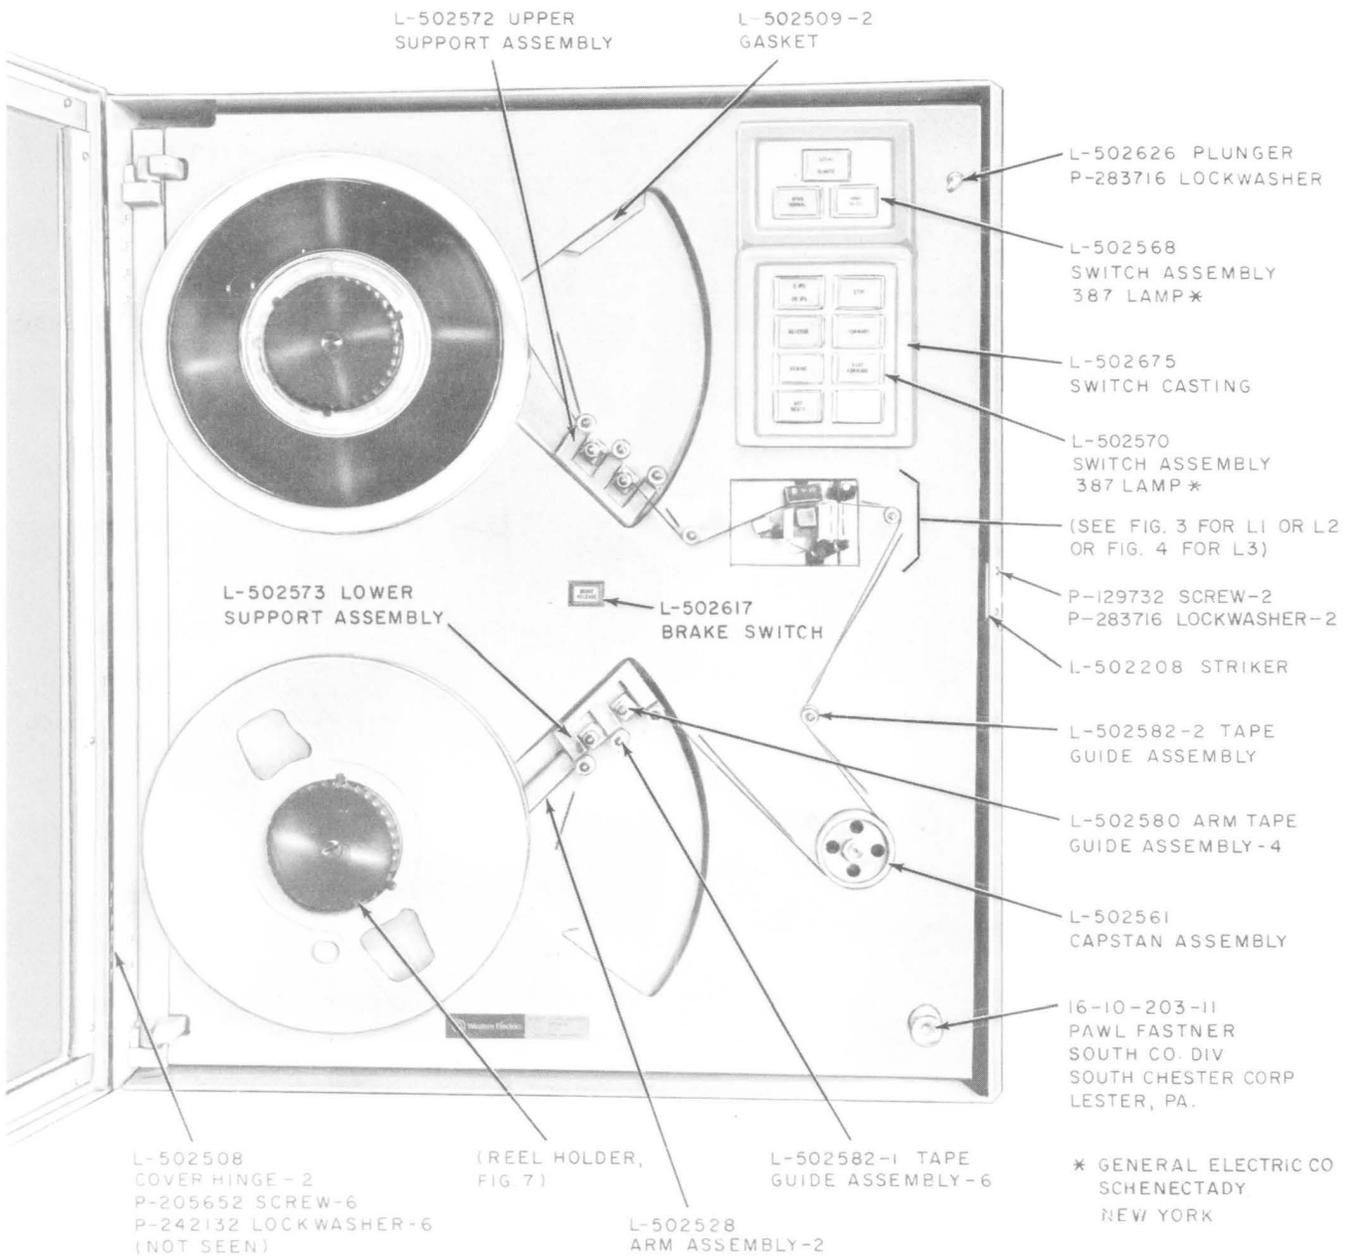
KS-20571 Recorder—Front View With Dust Cover Door Open
